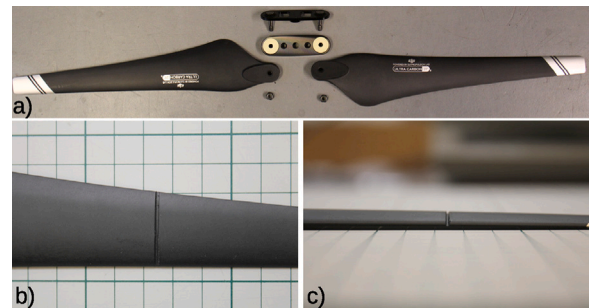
The 2170R Folding Propeller: (a) Disassembled, modified with a groove (b) Top view, (c) Front view.
